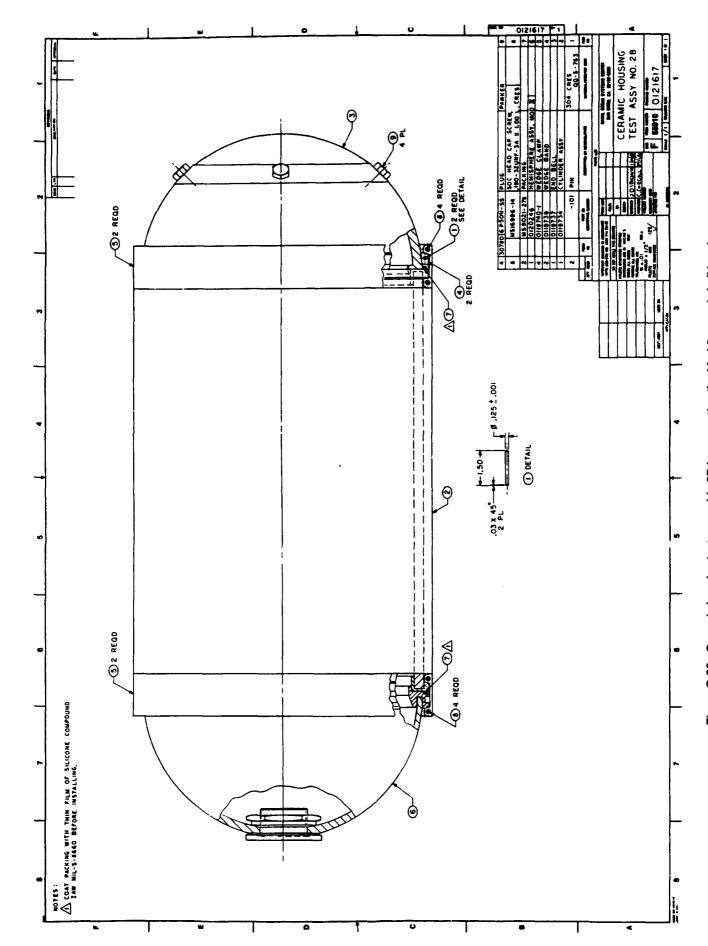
Ceramic housing test assembly 2B incorporating the Mod 2 ceramic bulkhead.
